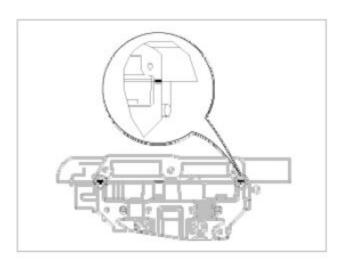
Identifying RH Cylinder Head Cover Sealant Applying Area Courtesy of HYUNDAI MOTOR AMERICA
